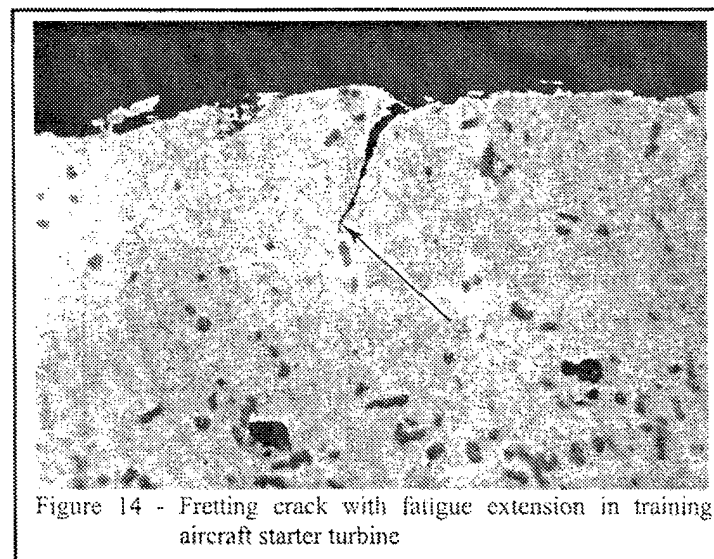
Fretting crack with fatigue extension in training aircraft starter turbine
